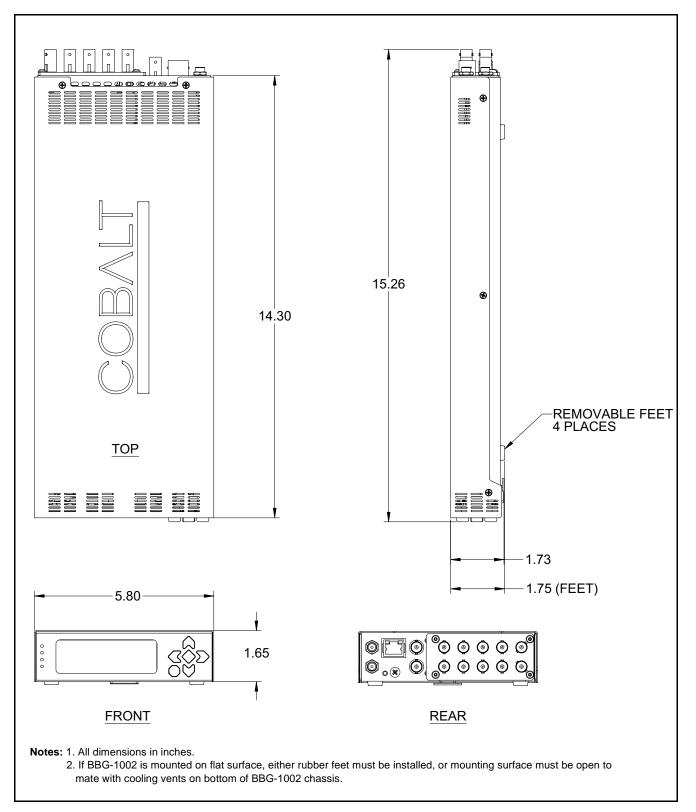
BBG-1002-UDX-FS Dimensional Details
